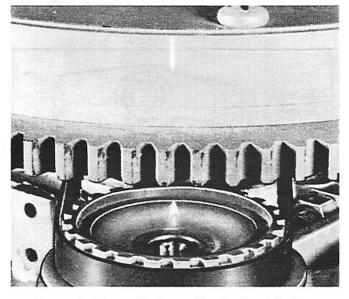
Timing Marks on Flywheel and Pulley Section IV - Ignition Master Service Manual
